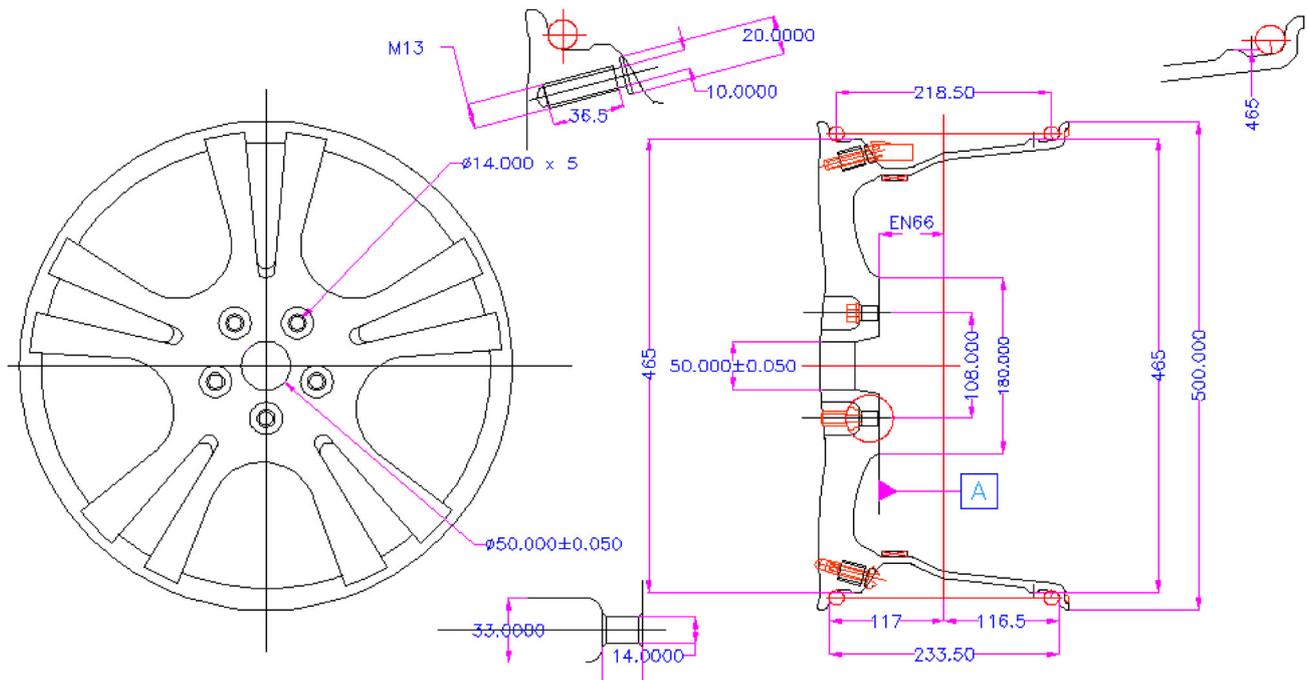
Alloy wheel machining drawing with center hole diameter of $\phi 50.000^{(\pm 0.050)}$
